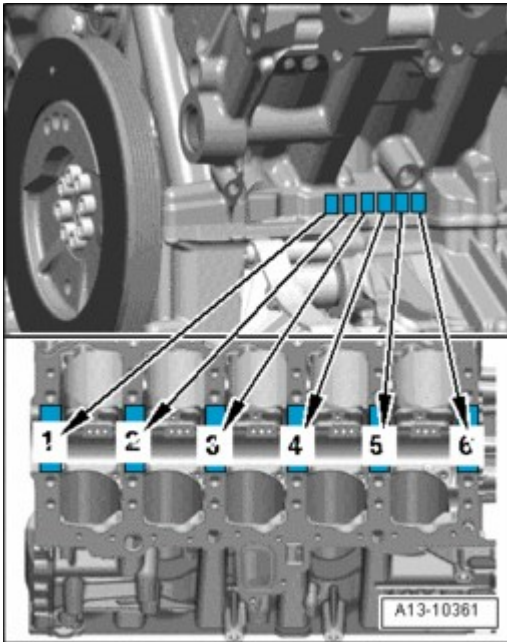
Allocation Of Crankshaft Bearing Shells For Cylinder Block
